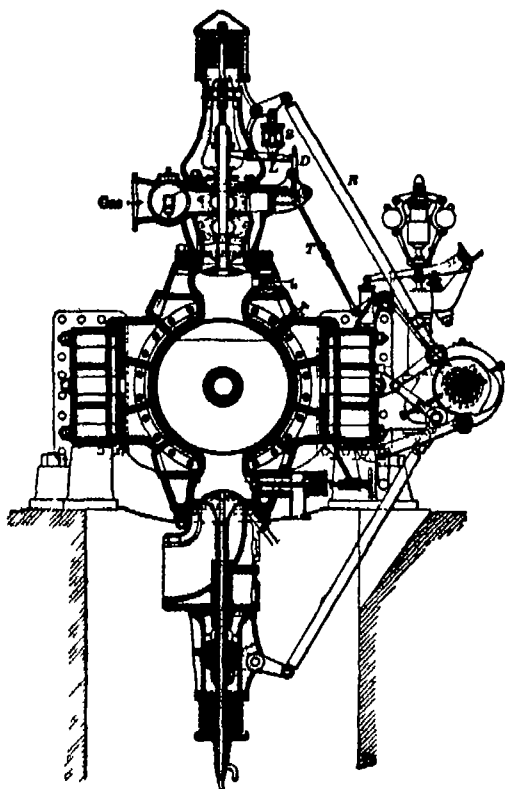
VALVE MECHANISM OF THE COCKERILL ENGINE
